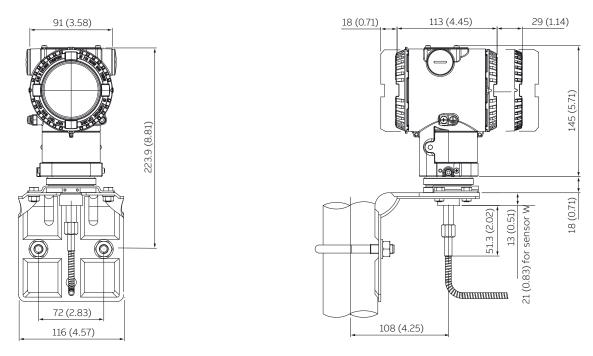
266HRH, 266NRH with barrel housing and remote seal(s) on bracket for vertical or horizontal 60 mm. (2 in.) pipe sensors F, H, M, P, Q, S, W
